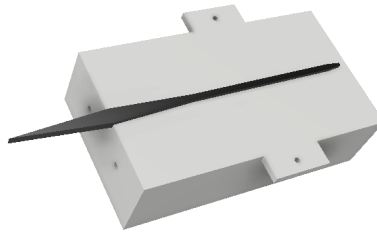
Cross-sectional view of DRA cladding with full DRA inside
